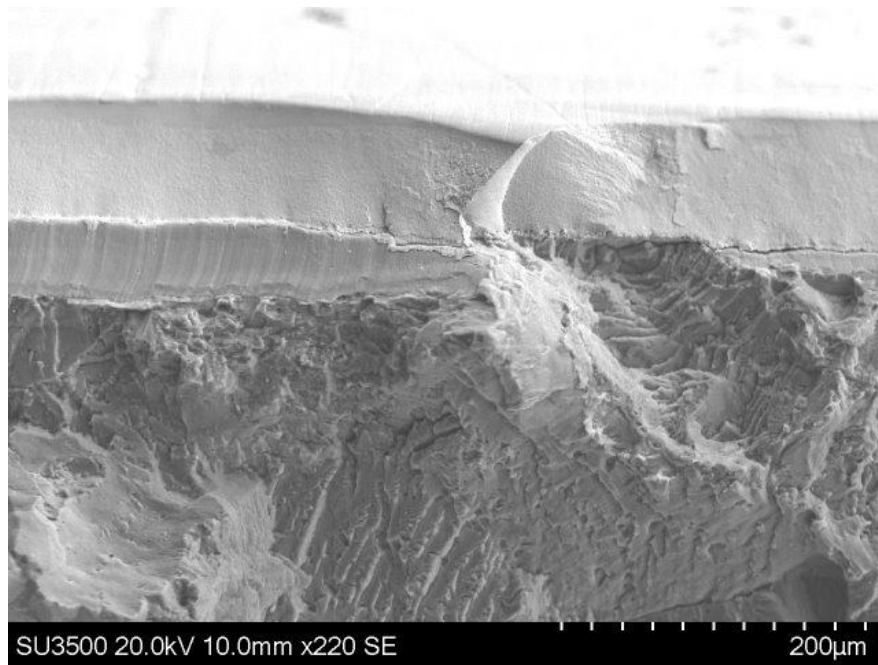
Detail view location L on fracture surface of specimen H16.
